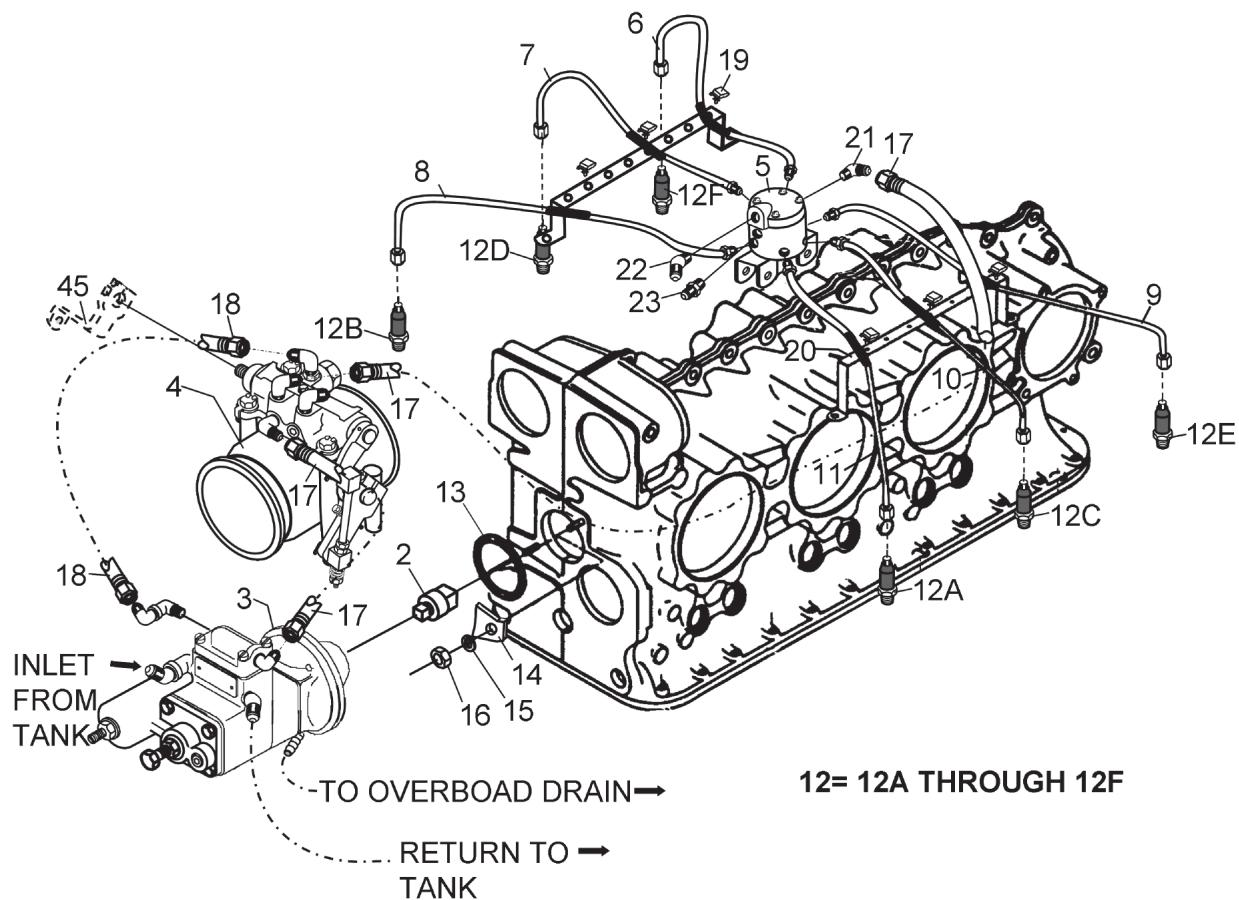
IO-550-A Fuel Injection Assembly A
